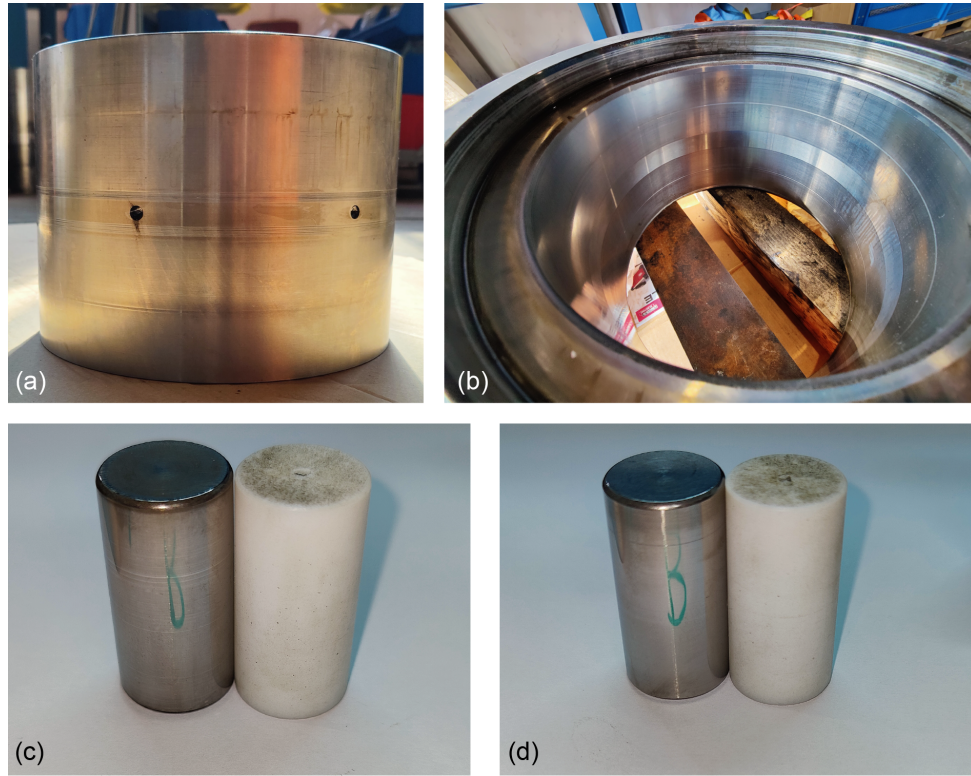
Pictures of the pre-test inspection of the bogie wheel bearing, showing: (a) the static inner raceway, (b) the dynamic outer raceway, and (c–d) two steel and PTFE rollers.
